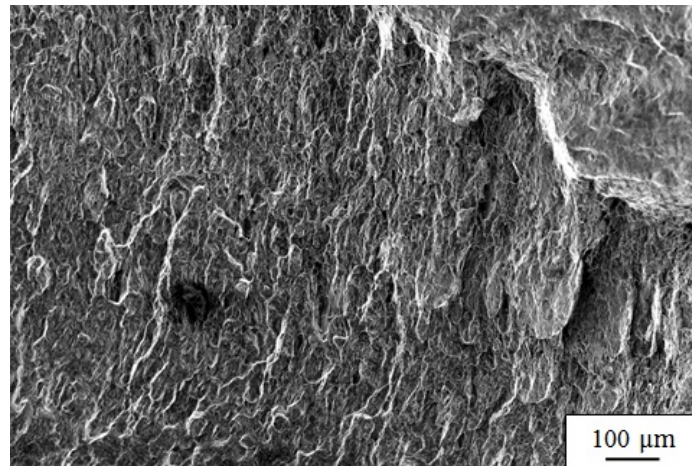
Angled cracking on the fracture surface for the 150 MPa stress amplitude specimen.
